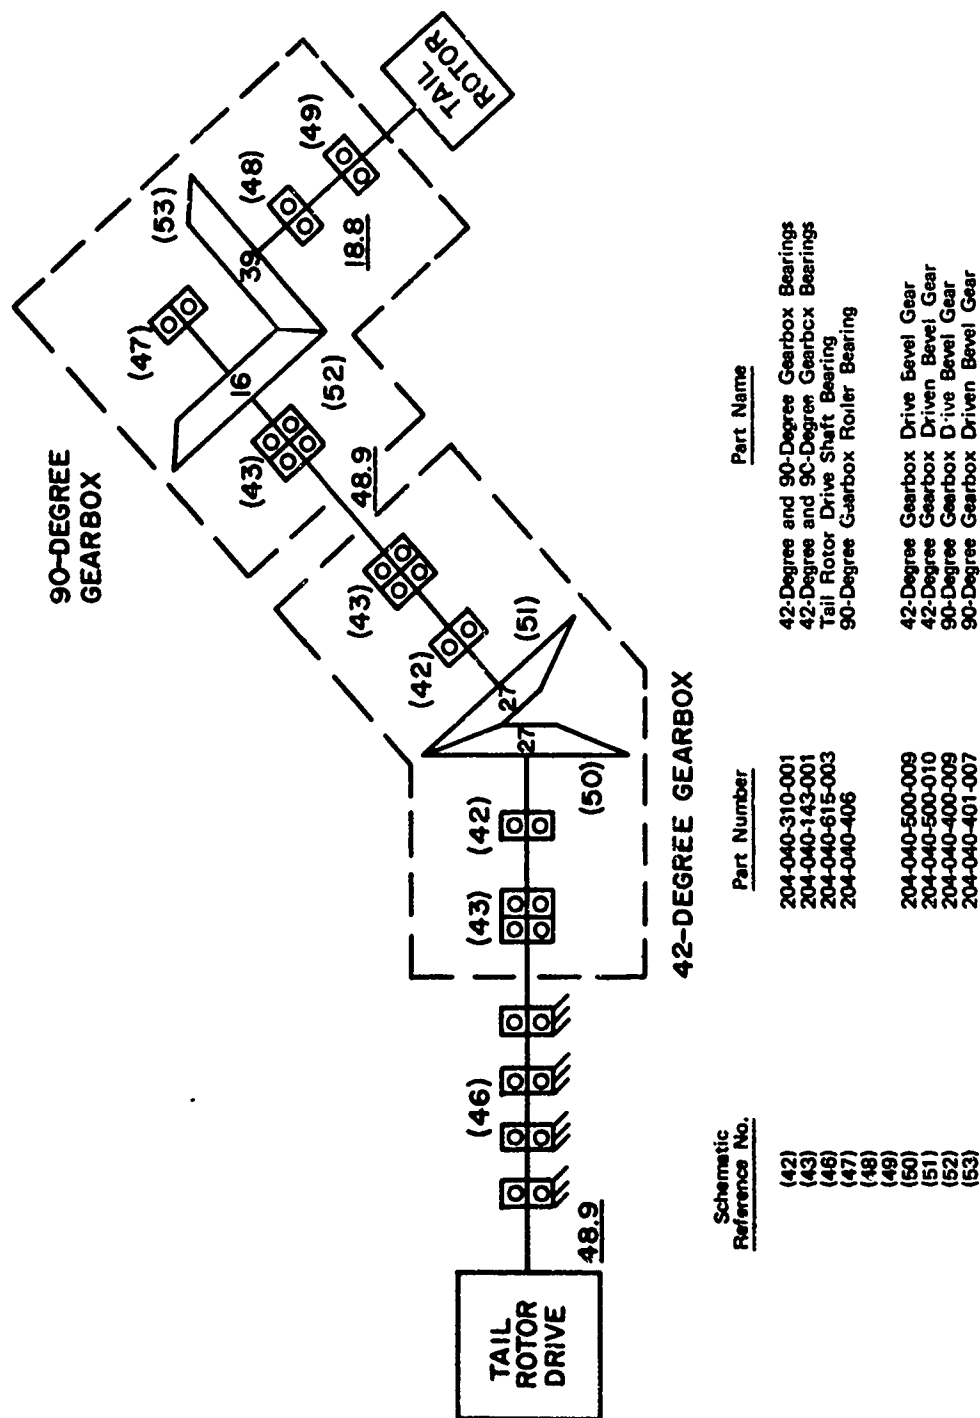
Gear Train Schematic - UH-1D Helicopter Tail Rotor Gearbox.
